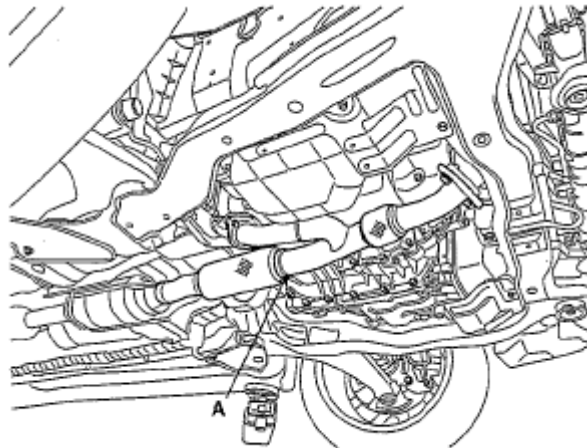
Identifying Exhaust Pipe Components With Torque Specifications
